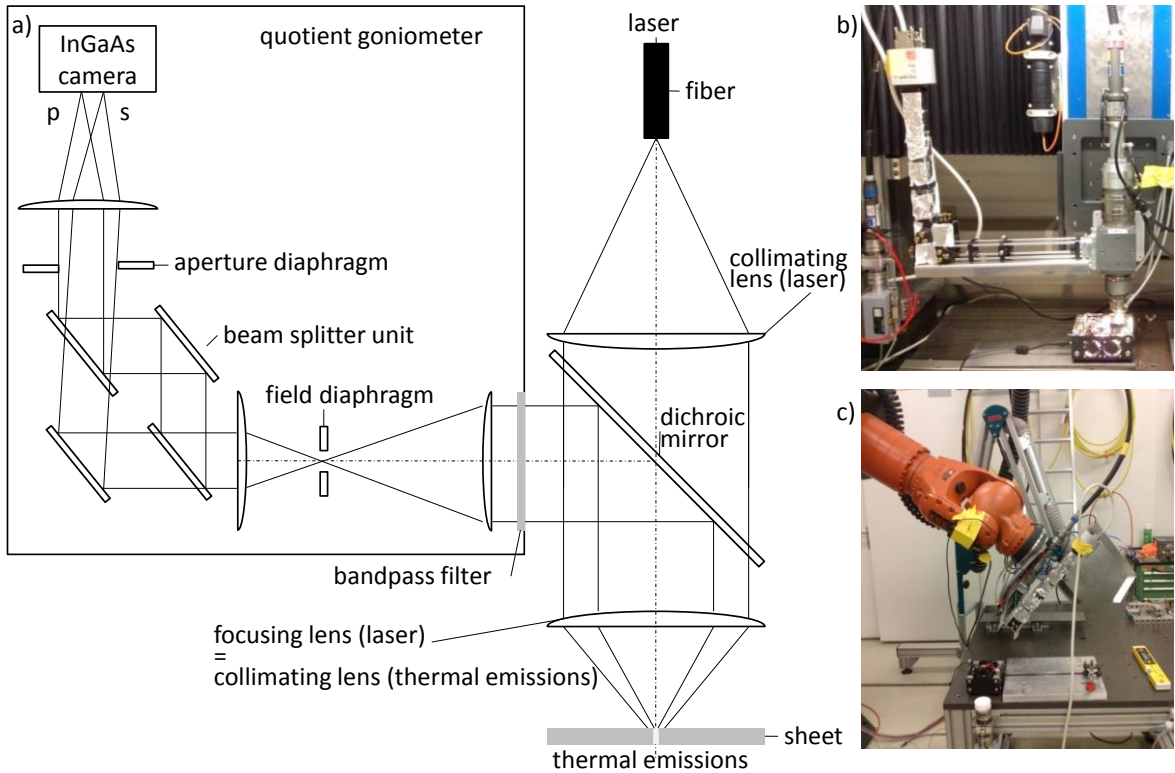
Scheme of the experimental setup (a), laser cutting device (b), fixed on a robot for the calibration (c).
